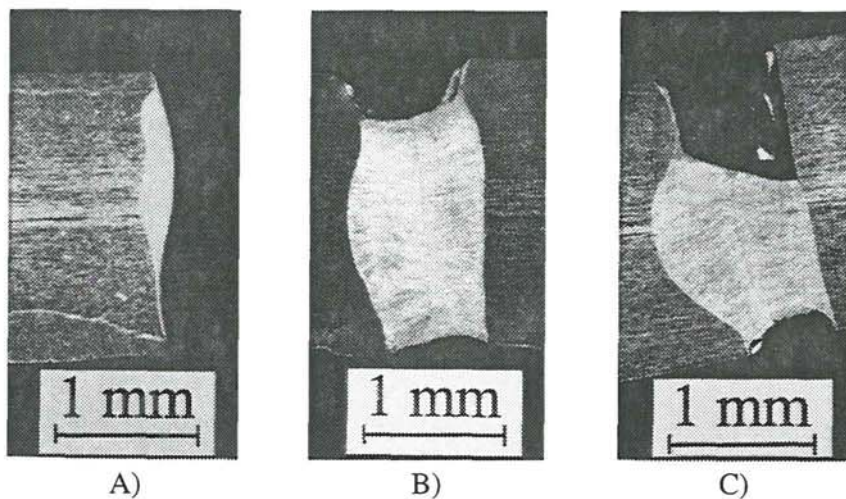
Practical results of using the geometrical modification shown in figure 6 at a gap width of 0.4 mm. A) One side of a fig 6A type "weld". No weld produced. Both edges experienced only surface melting. B) A weld made with the same gap width but with the preweld edge preparation shown in figure 6B ($\alpha = 60^\circ$). Successful hermetic seal weld produced. C) A weld made with the same gap width but with the preweld geometry shown in figure 6C ($\alpha = 10^\circ$). Successful hermetic seal weld produced.
